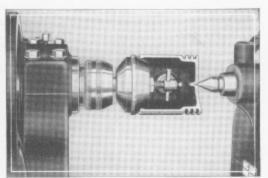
A Semi-Machined Piston Mounted in the Lathe on a No. 44 Piston Adapter
